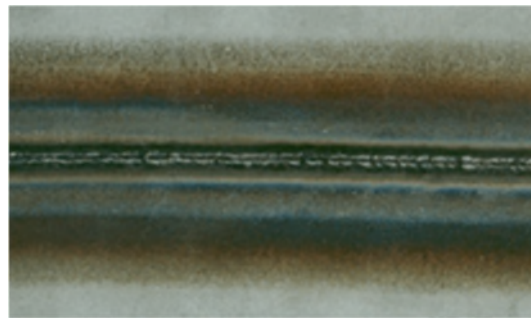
Unacceptable - Oxide layer present (grey colour), weld burned; lack of proper back-purging
